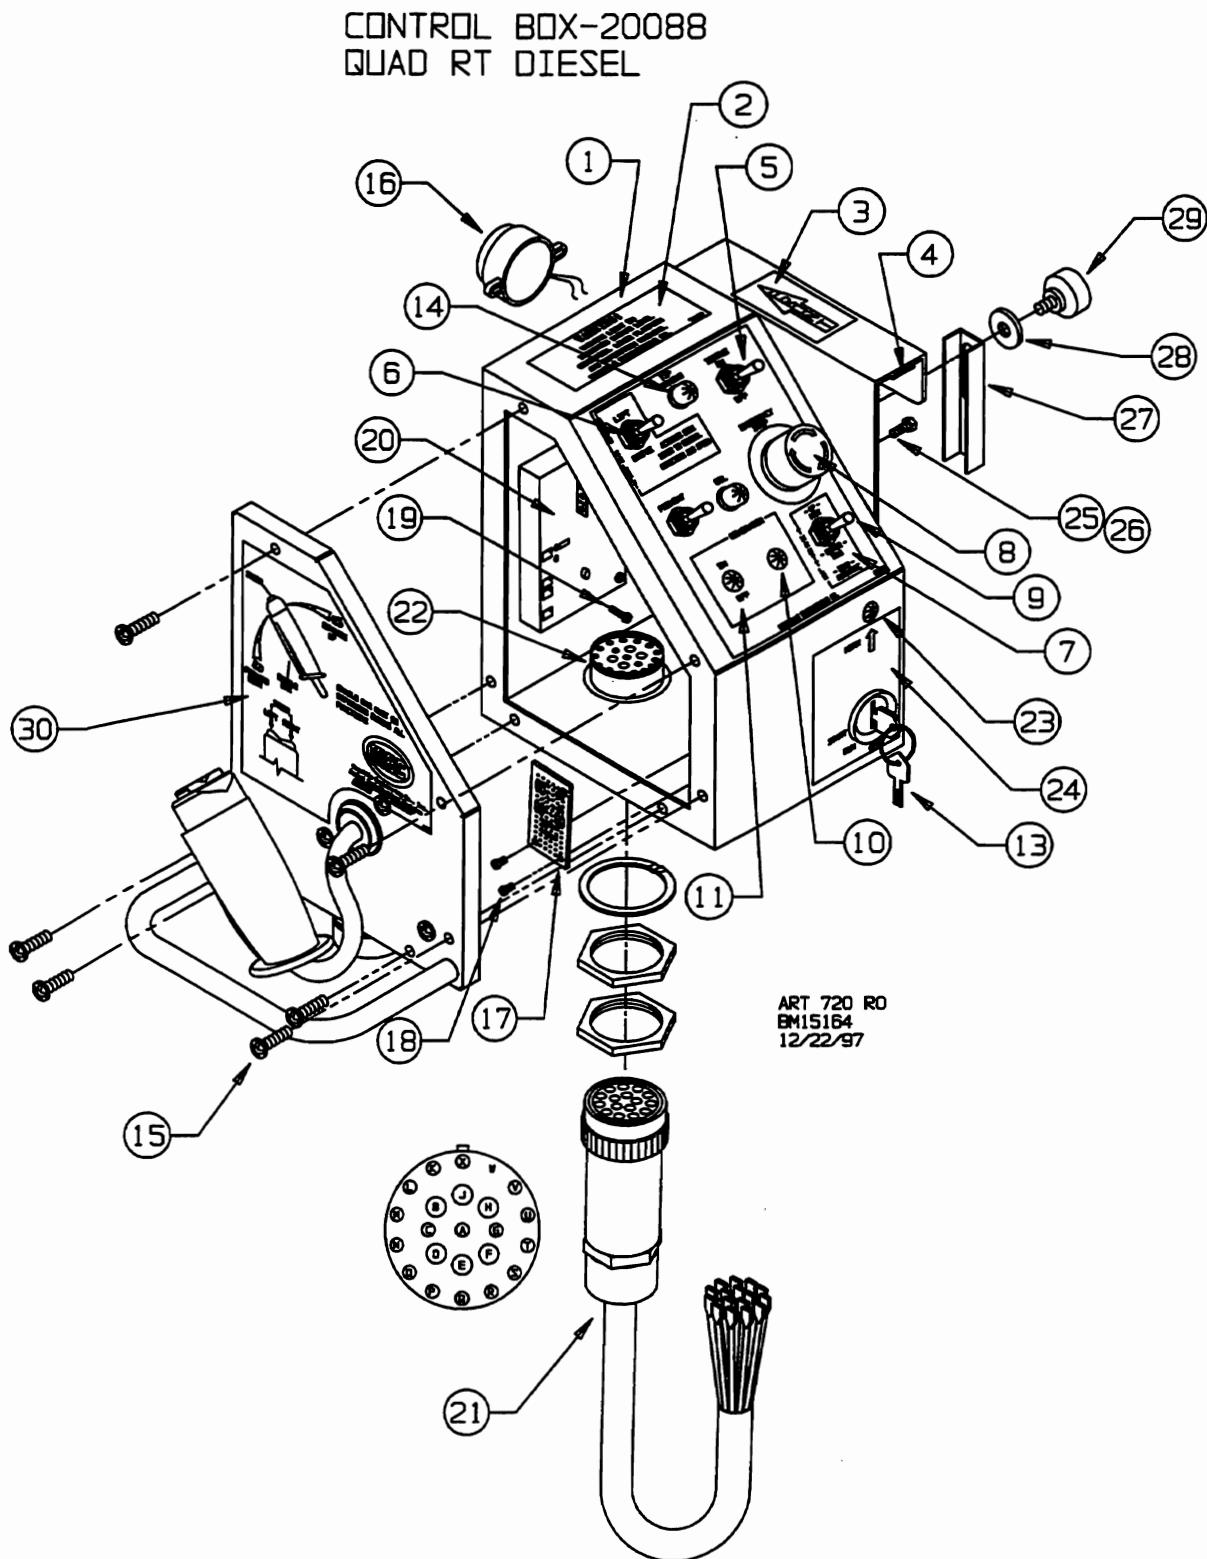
F- Joystick Control Box Assembly D.F. (new style)
